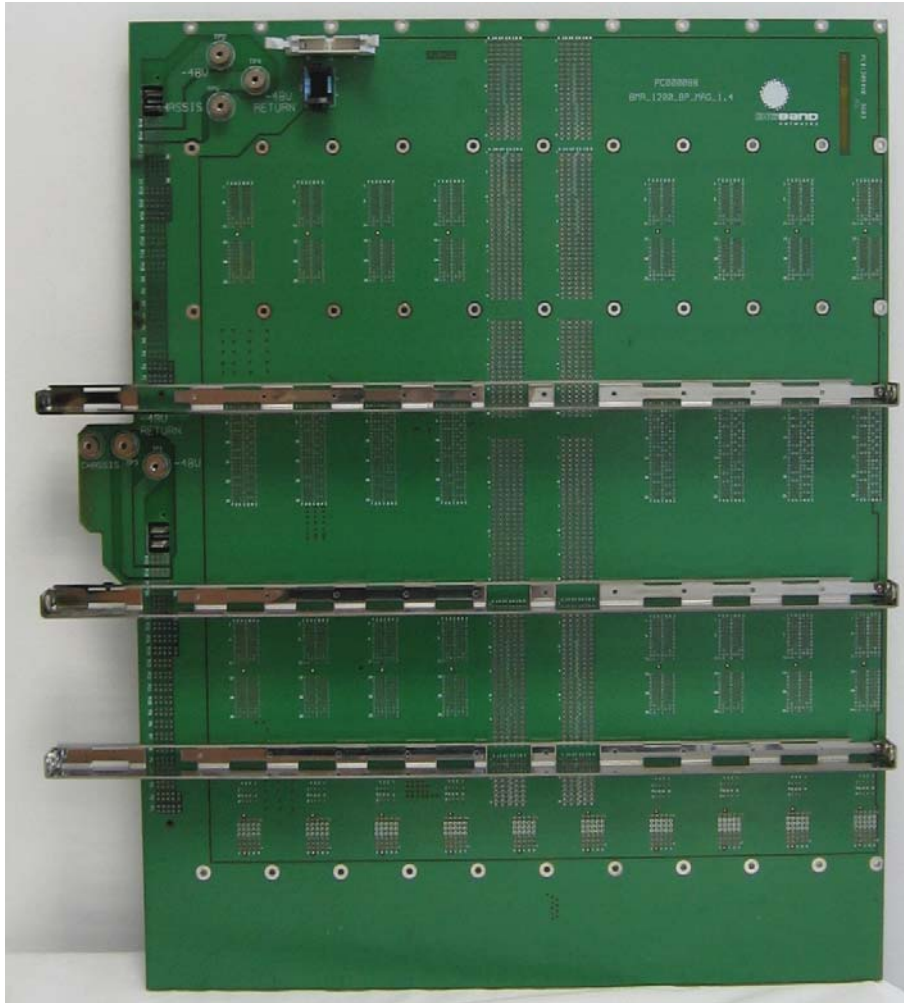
Chassis Rear View - after Removing Top and Side Covers
